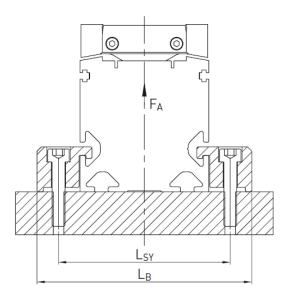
Mounting with clamping profiles - HM040S, HM060S, HM080S
